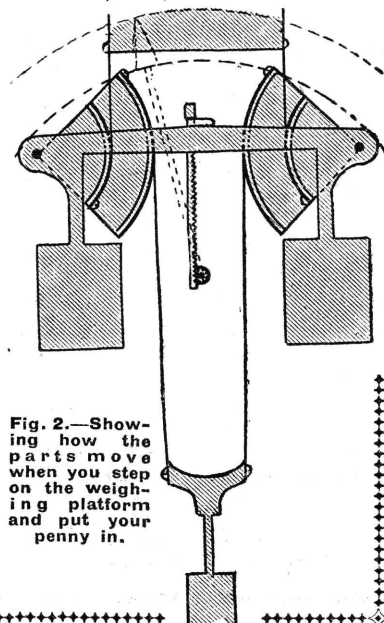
Showing how the parts move when you step on the weighing platform and put your penny in.
